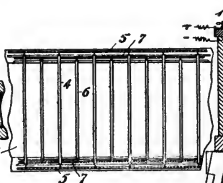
CROSS SECTION OF TANK OF FLEISCHER CHAIN CONVEYER MACHINE
